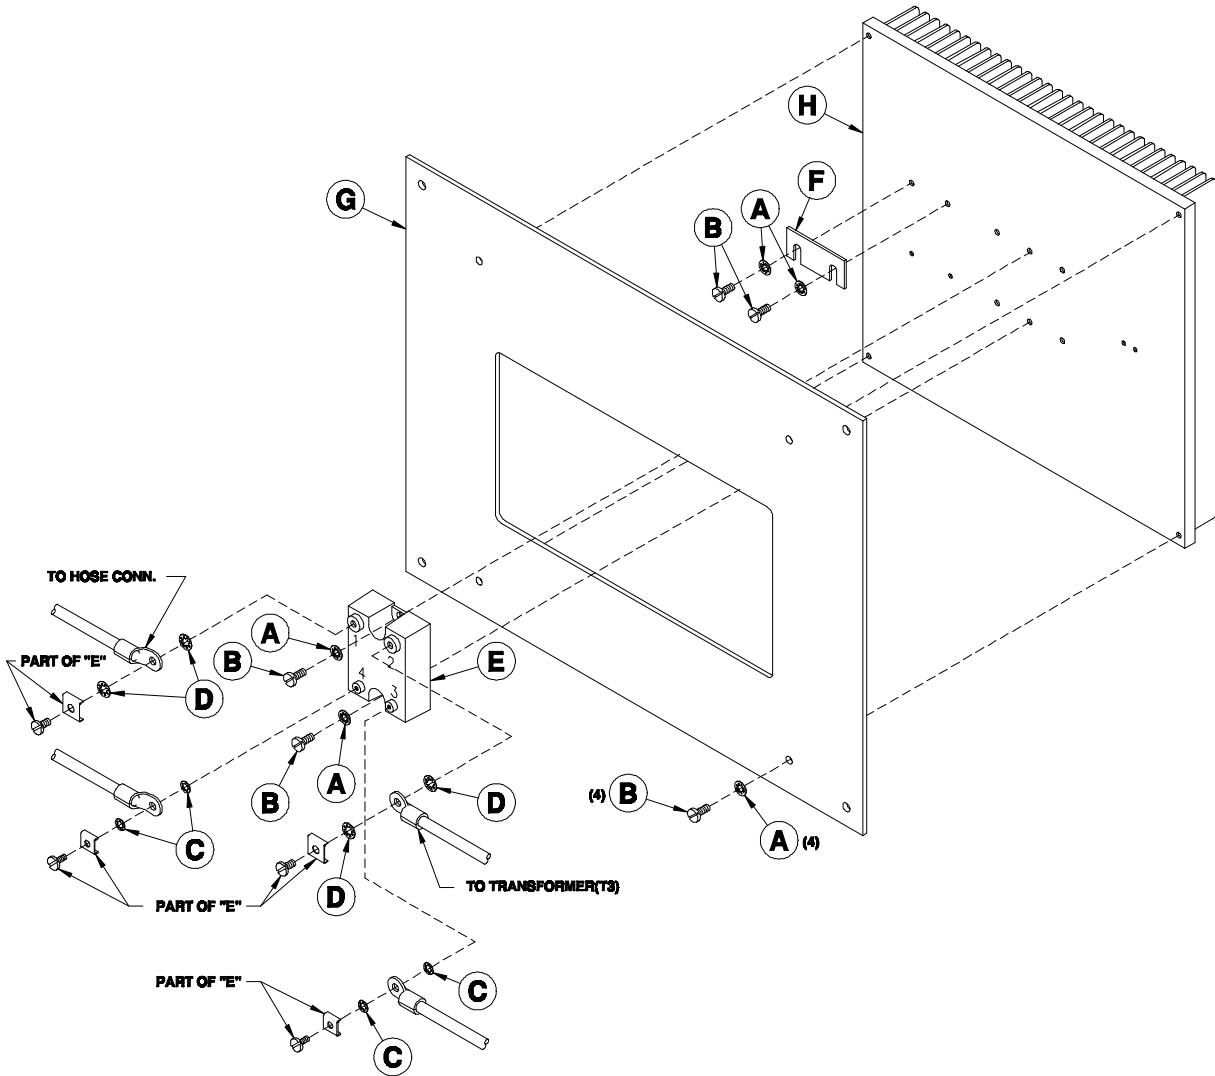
H-2000 (IHTC) Assembly (Part No. 15000-SIZE-IHTC) Exploded View Sheet 3 of 5
